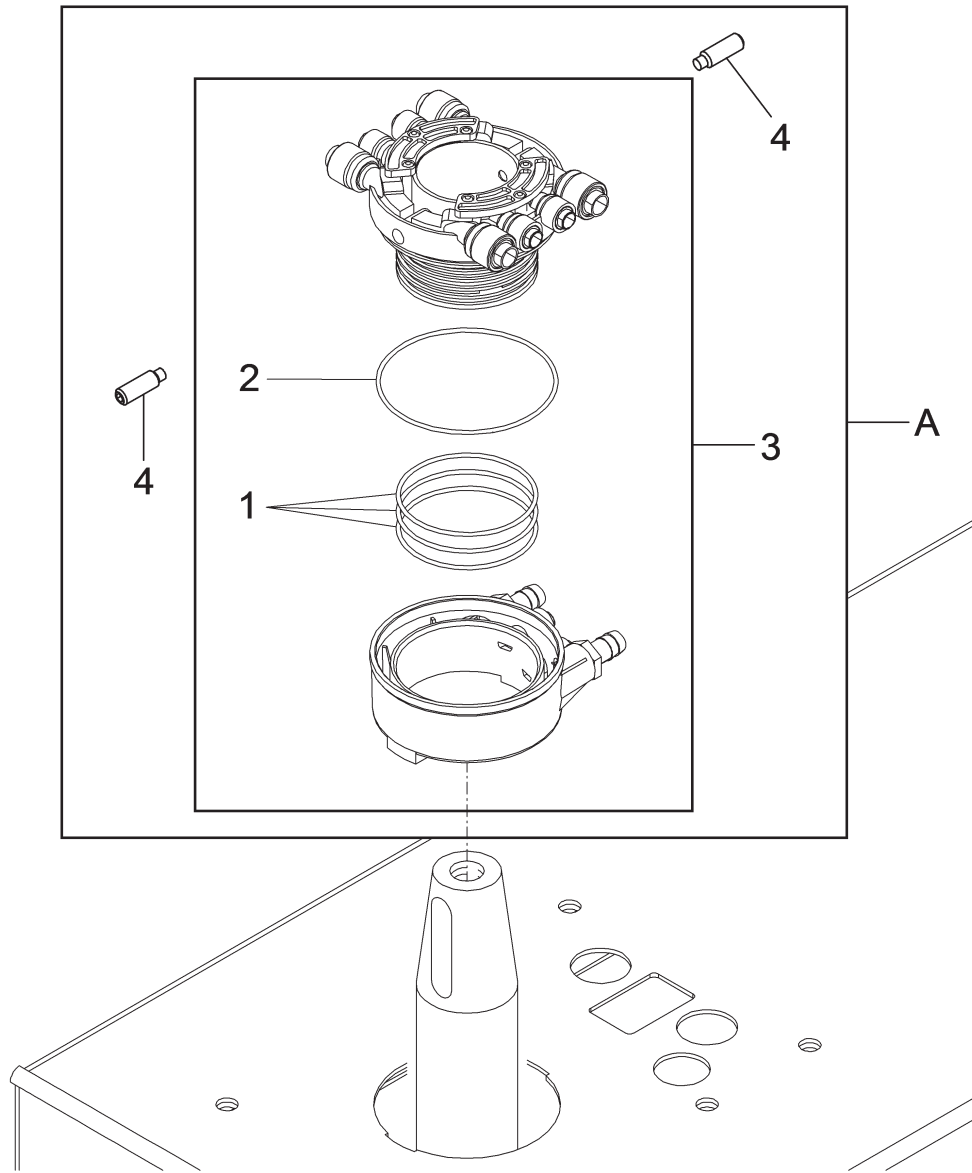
Rev. 3			VS730094800			→	←	10476759
